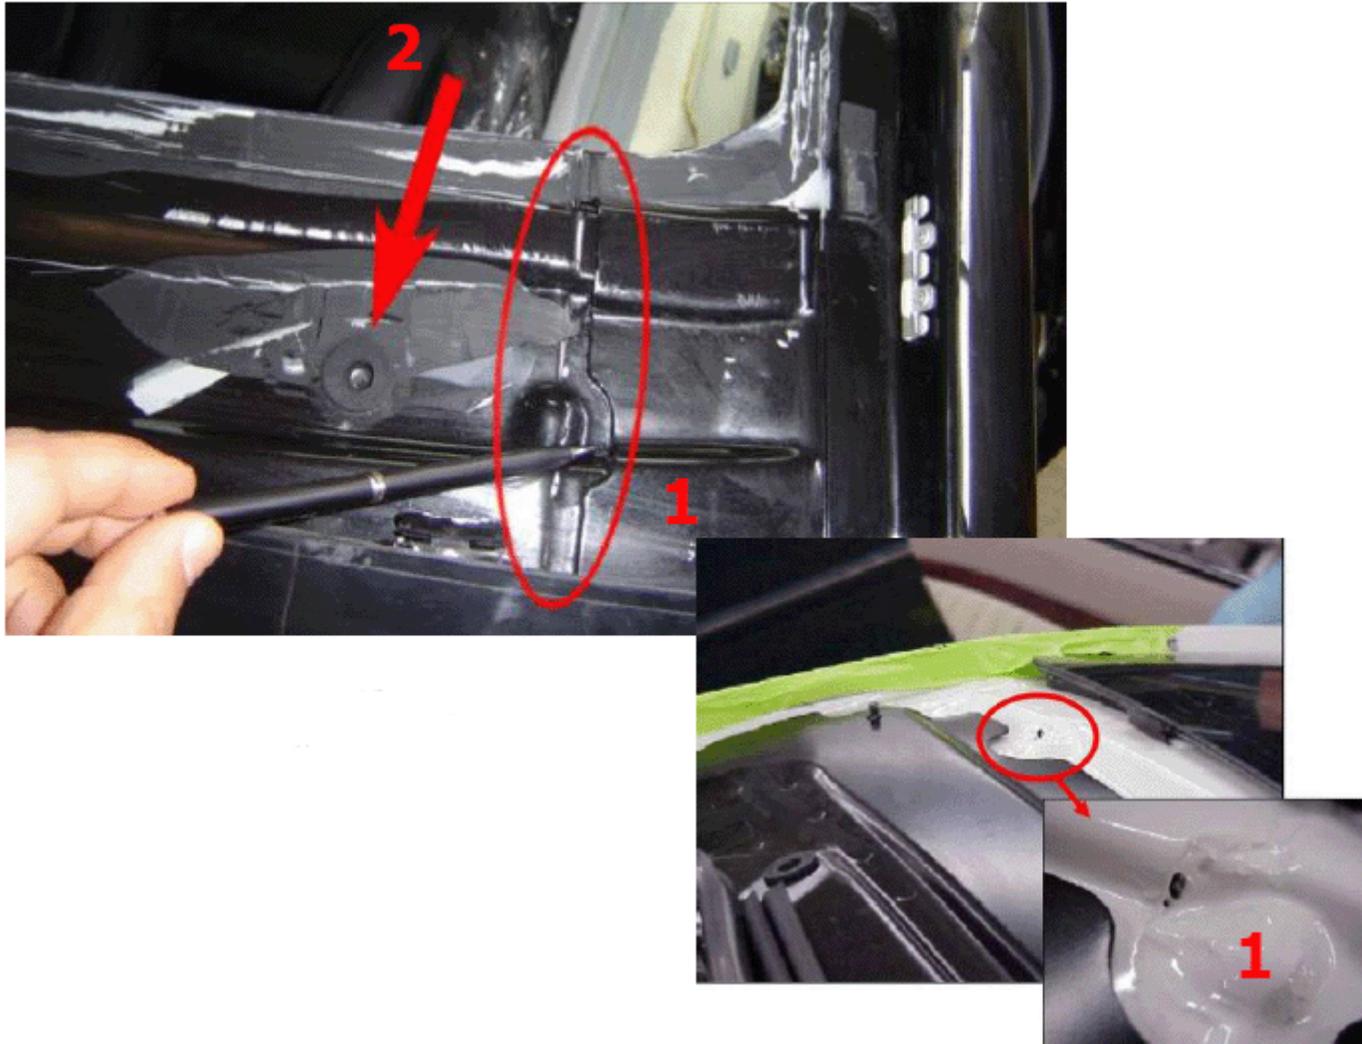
Weld seam sealing and rubber bushing sealing
